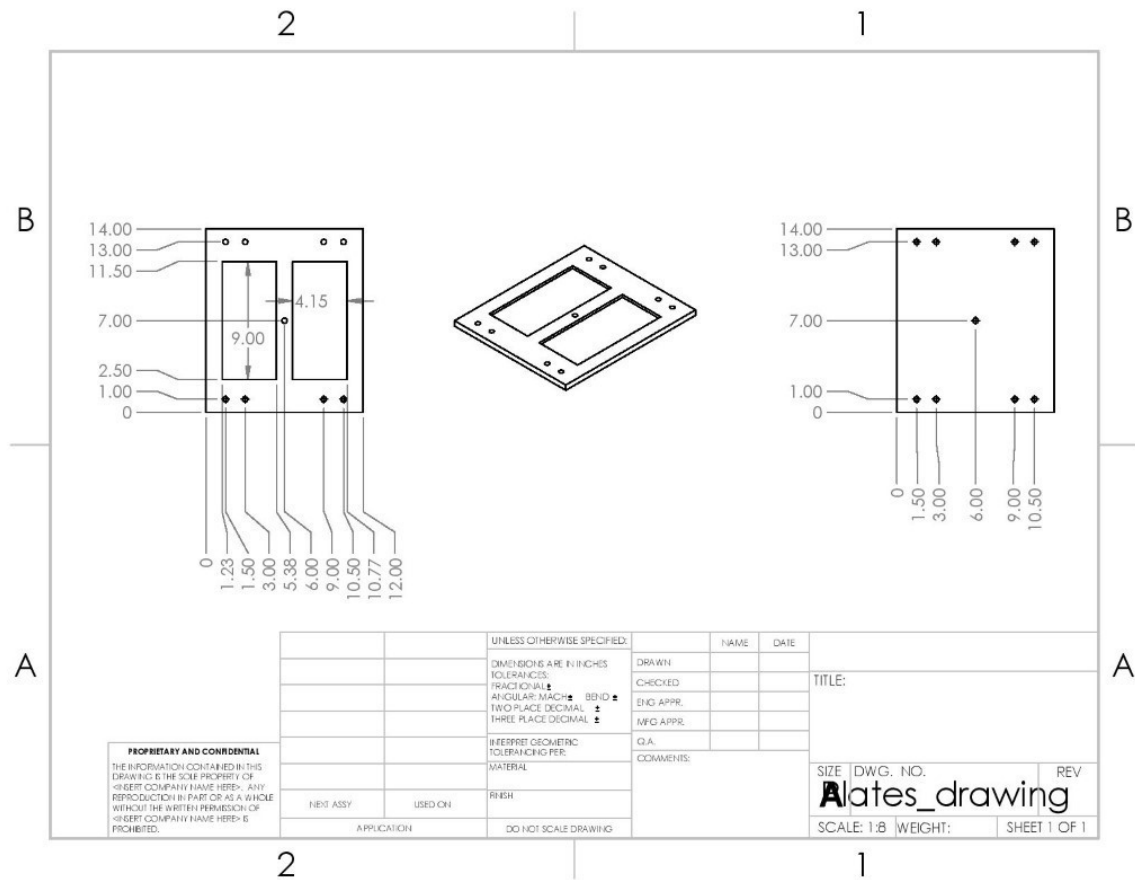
SolidWorks drawing of plastic plates used by an automated milling machine for the balloon suspension anchor
